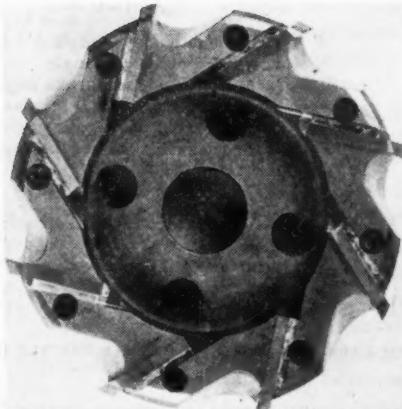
CUTTER 8 IN. DIAM WITH 8 INSERTED BLADES AT 30-DEG POSITIVE SECONDARY RADIAL RAKE ANGLE WITH NEGATIVE PRIMARY RADIAL RAKE ANGLE AT CUTTING EDGE
